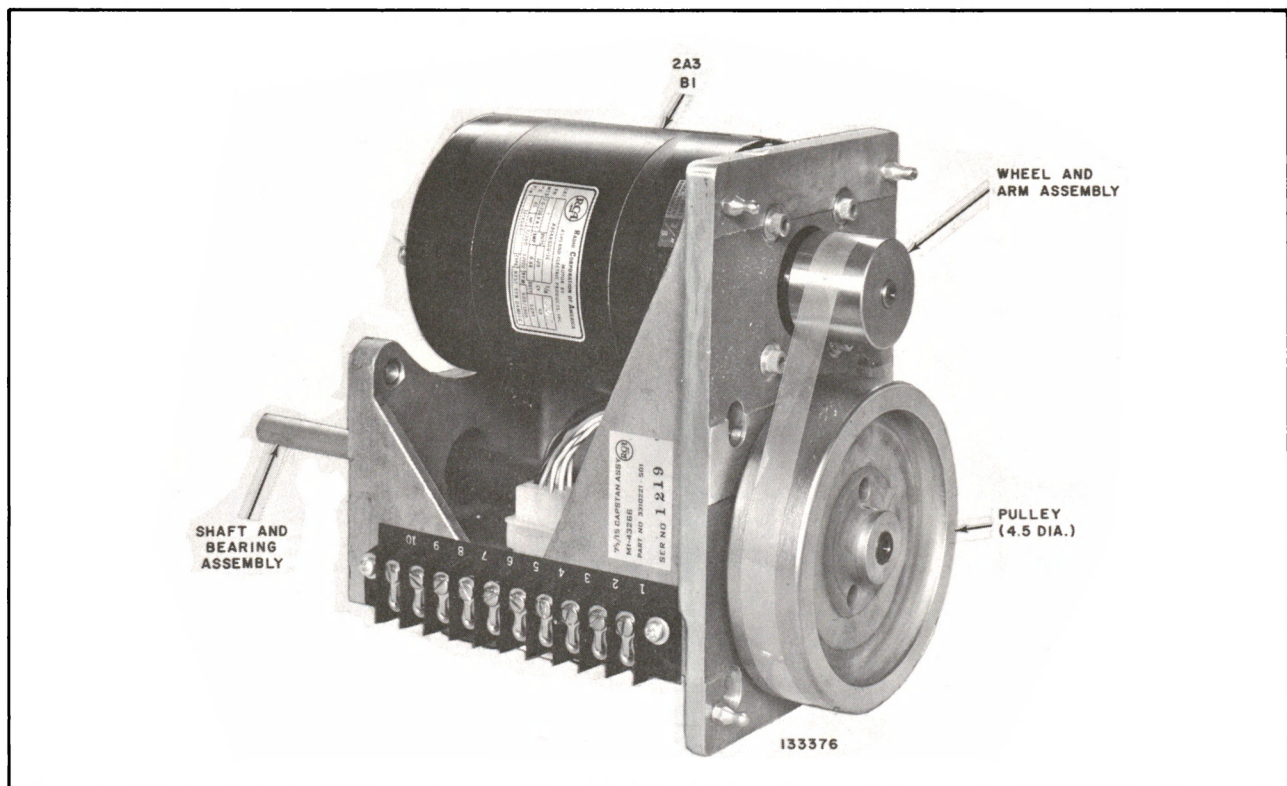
Capstan Motor and Flywheel Assembly (Two Speed)
